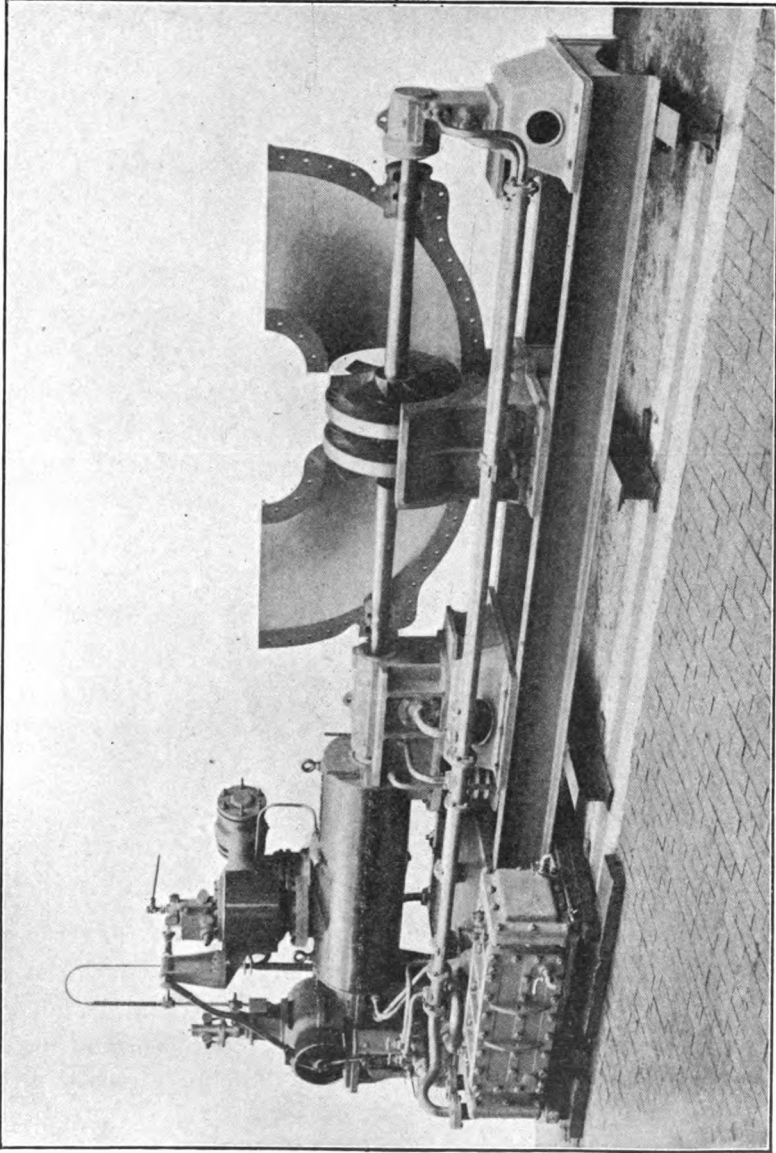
Parsons Turbo-Exhauster : View showing Internal Construction.
